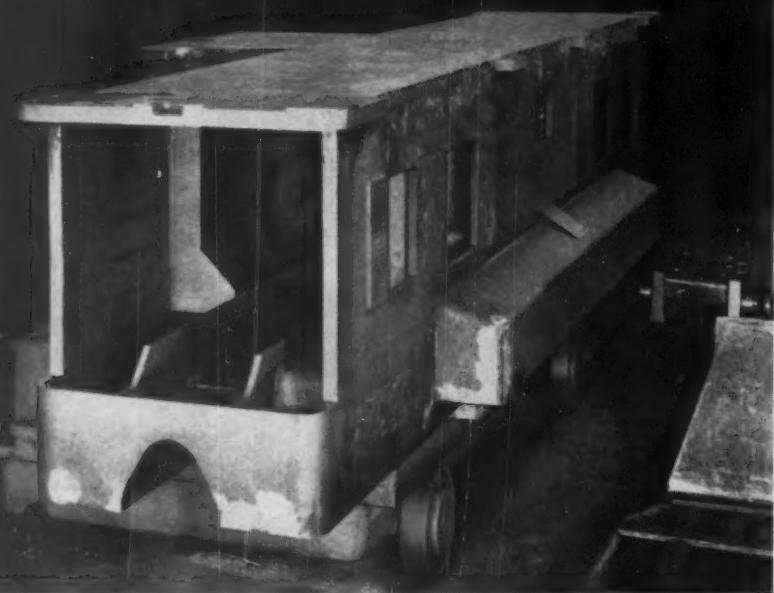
The H-beam running the length of the weldment can be seen inside this base.
